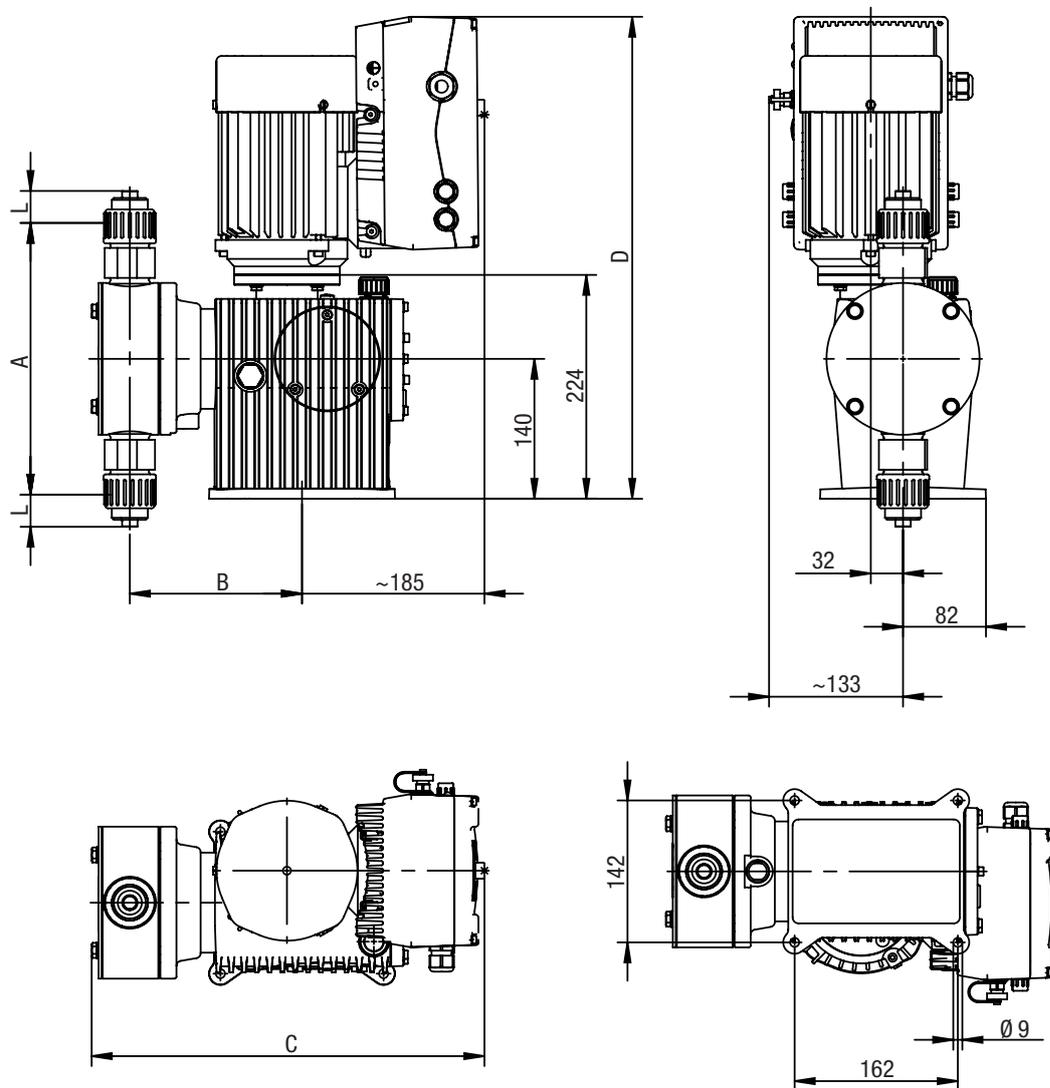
Dimensioned drawing MEMDOS LA 110, 160 – 1010
